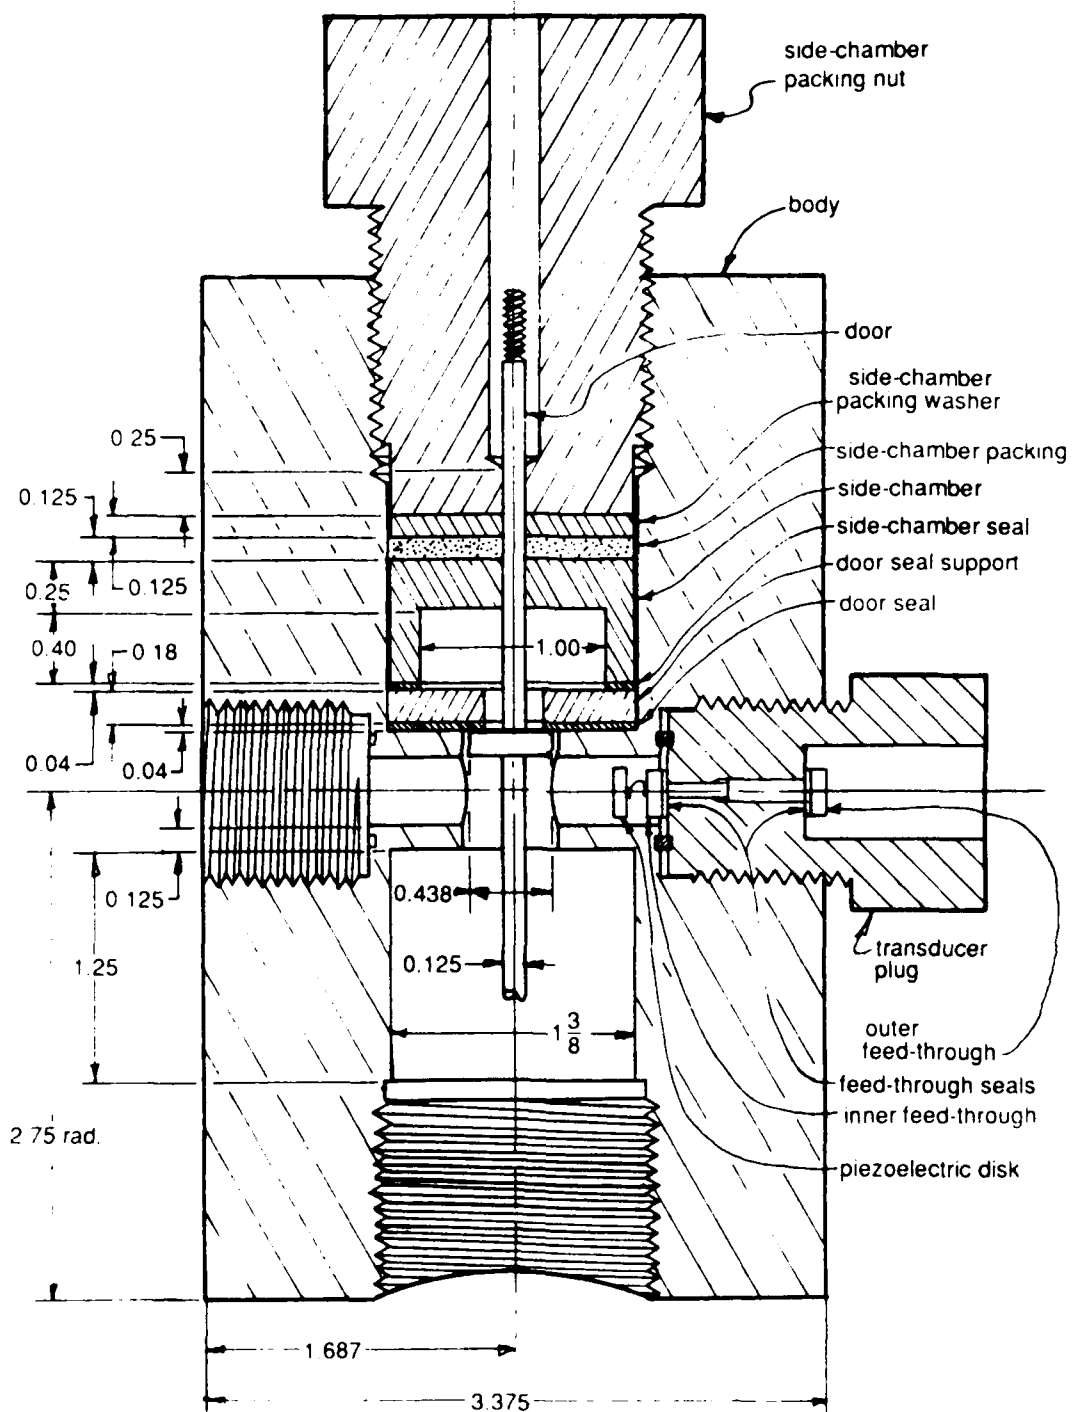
2 CROSS SECTIONAL VIEW OF CHAMBER SHOWING TRANSDUCERS AND SIDE-CHAMBERS. APPROXIMATELY FULL SCALE, DIMENSIONS IN INCHES.
